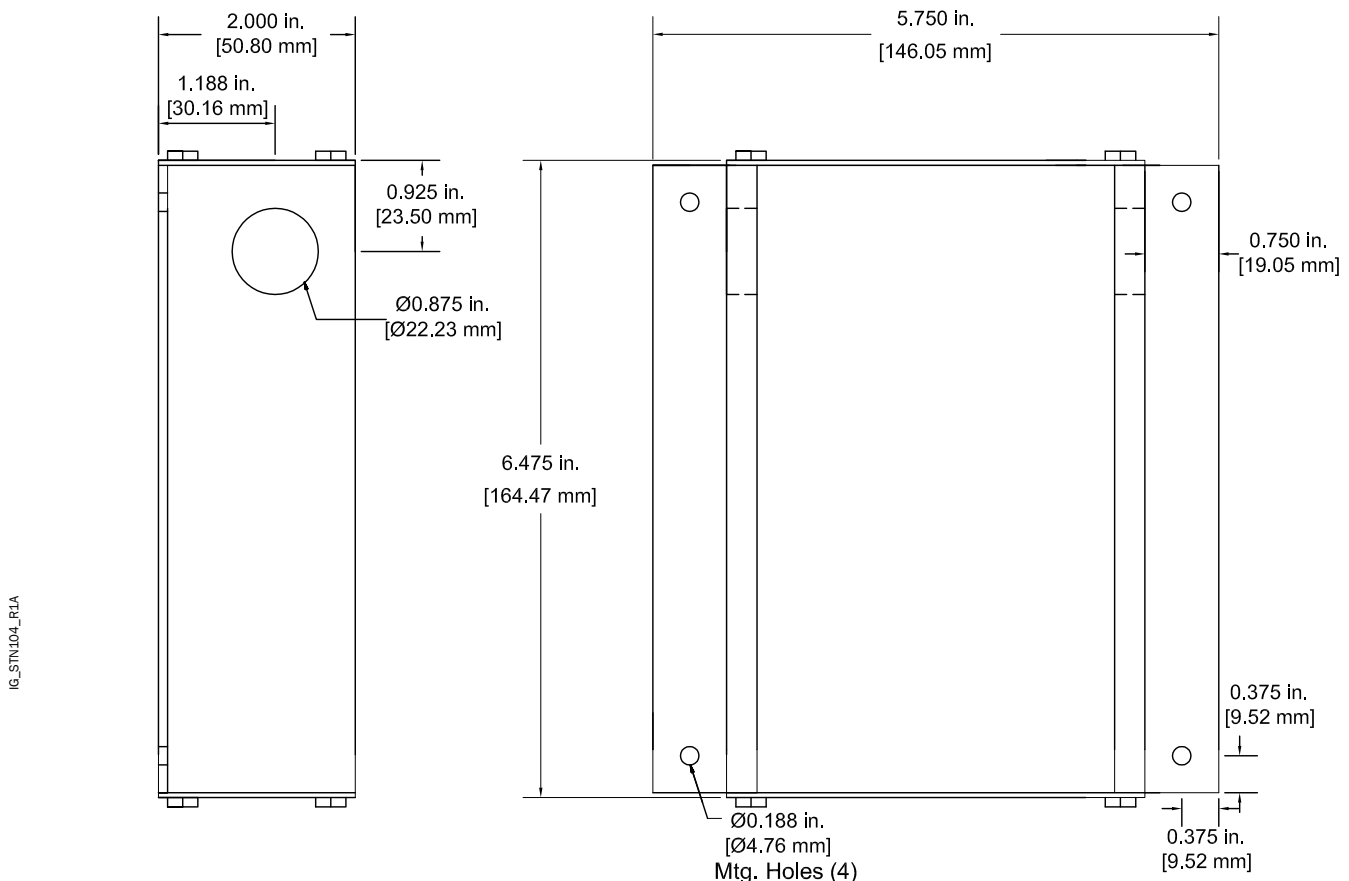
STN104 Transmitter Mechanical Detail Drawing
